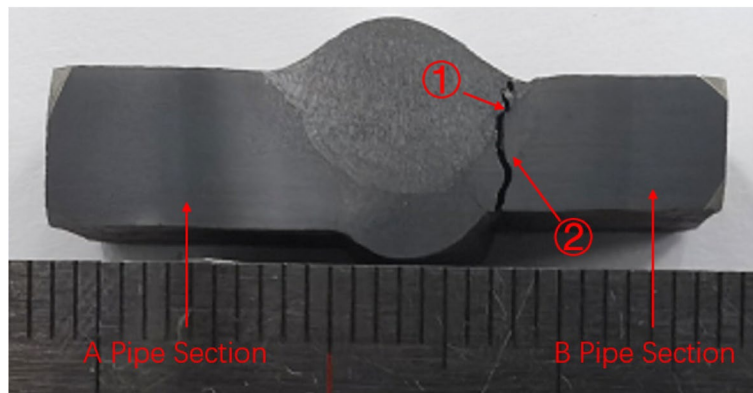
Macro-morphology of 1# (the upper part is the outer surface)
